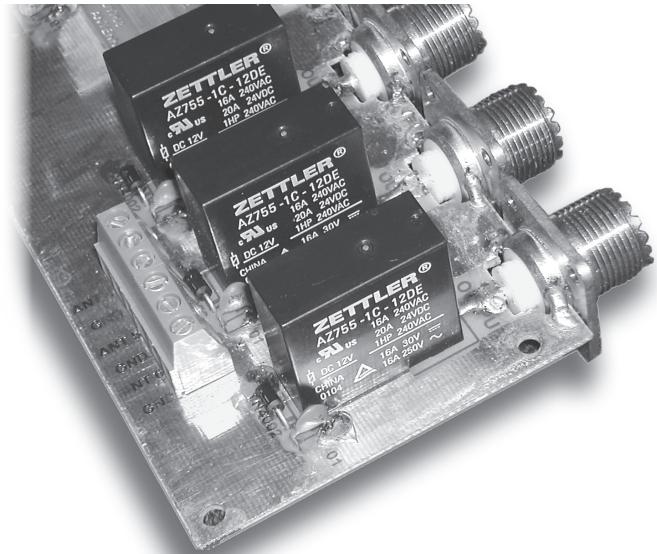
Connector flanges are soldered to the board's ground plane top and bottom. The ground ends of D1-D6 and C1-C6 are also soldered top and bottom. The relays have two pins each for the contact connections. Solder all pins and install eyelets supplied with the FAR Circuits board to ensure good connections for the relay common and normally closed pins.
